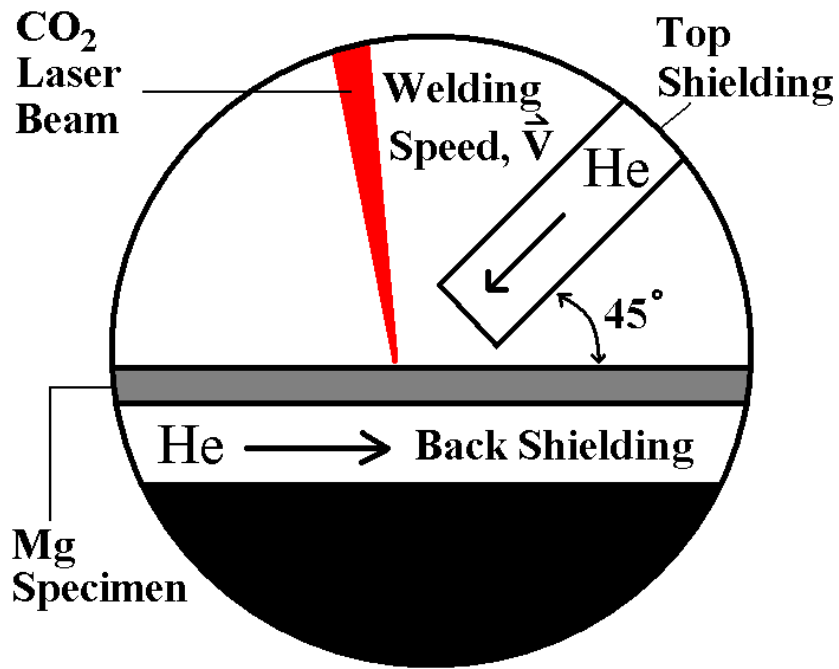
Schematic diagram of the CO₂ welding apparatus.
